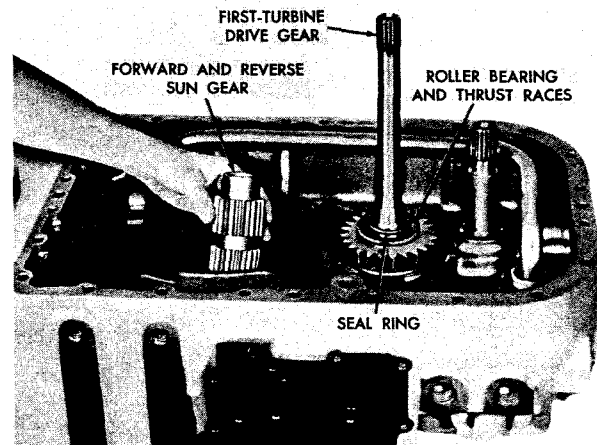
Removing (or installing) forward and reverse-range sun gear
